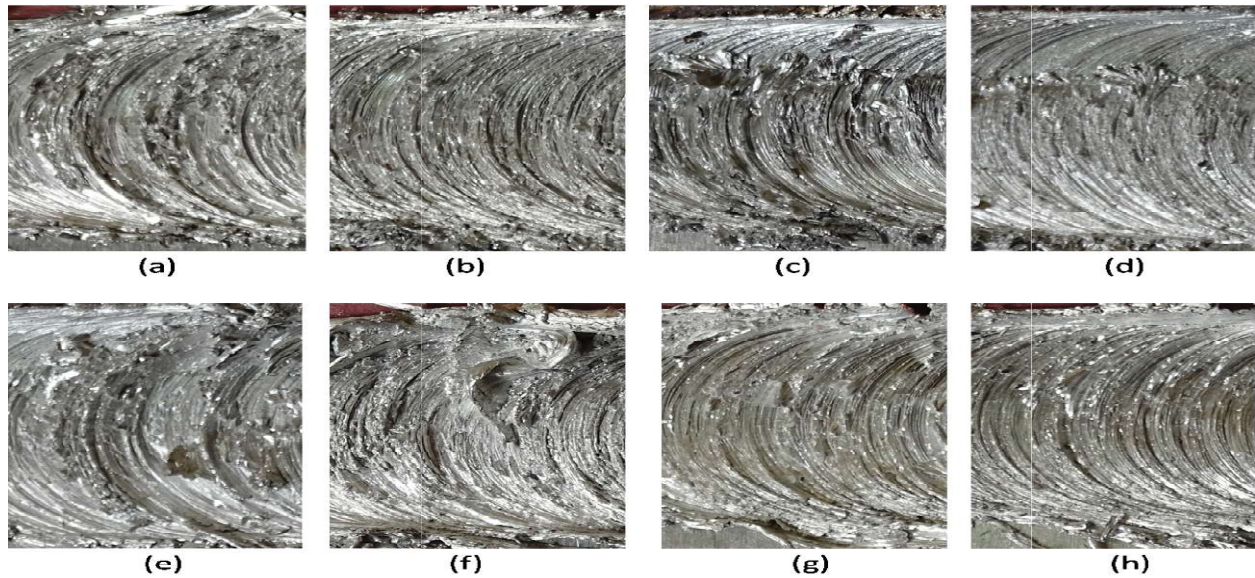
Magnified view of weld bead appearance- SCT tool (a) 800 rpm, (b) 1000 rpm,(c)1200 rpm,(d) 1400 rpm and SH tool (e) 800 rpm,(f) 1000 rpm, (g) 1200 rpm,(h) 1400 rpm
